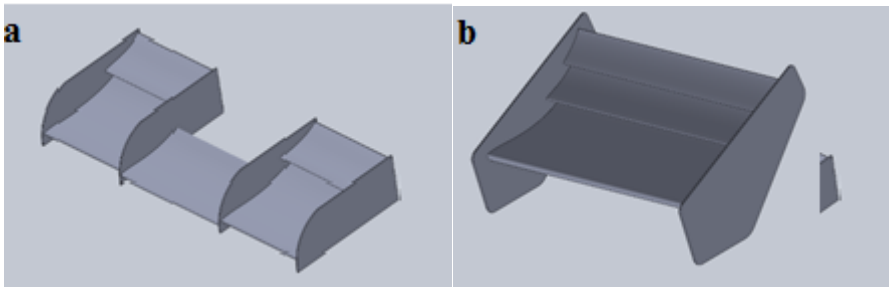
a). Front Wing Assembly and b). Rear Wing Assembly
